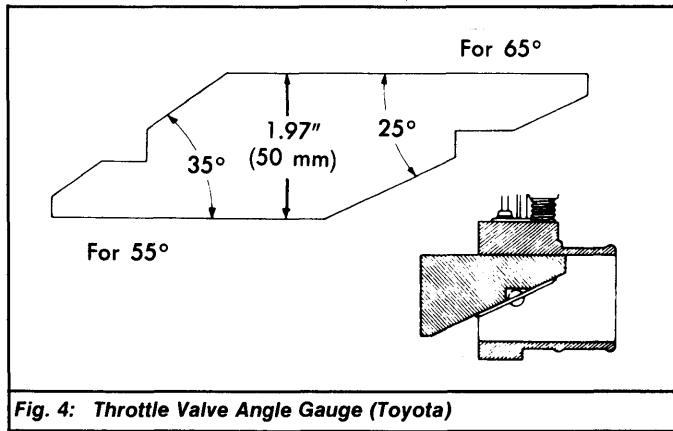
Throttle Valve Angle Gauge (Toyota)
